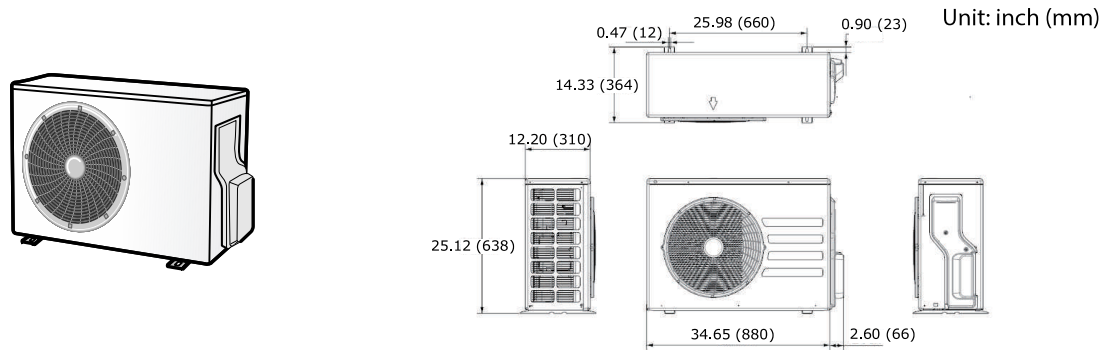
Dimensional drawing for 24 and 30 MBH capacity units
